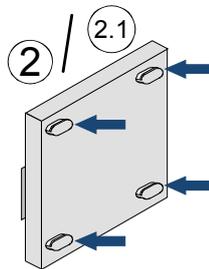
Rear of expansion module carrier with four holders (Part No. FX808323)
